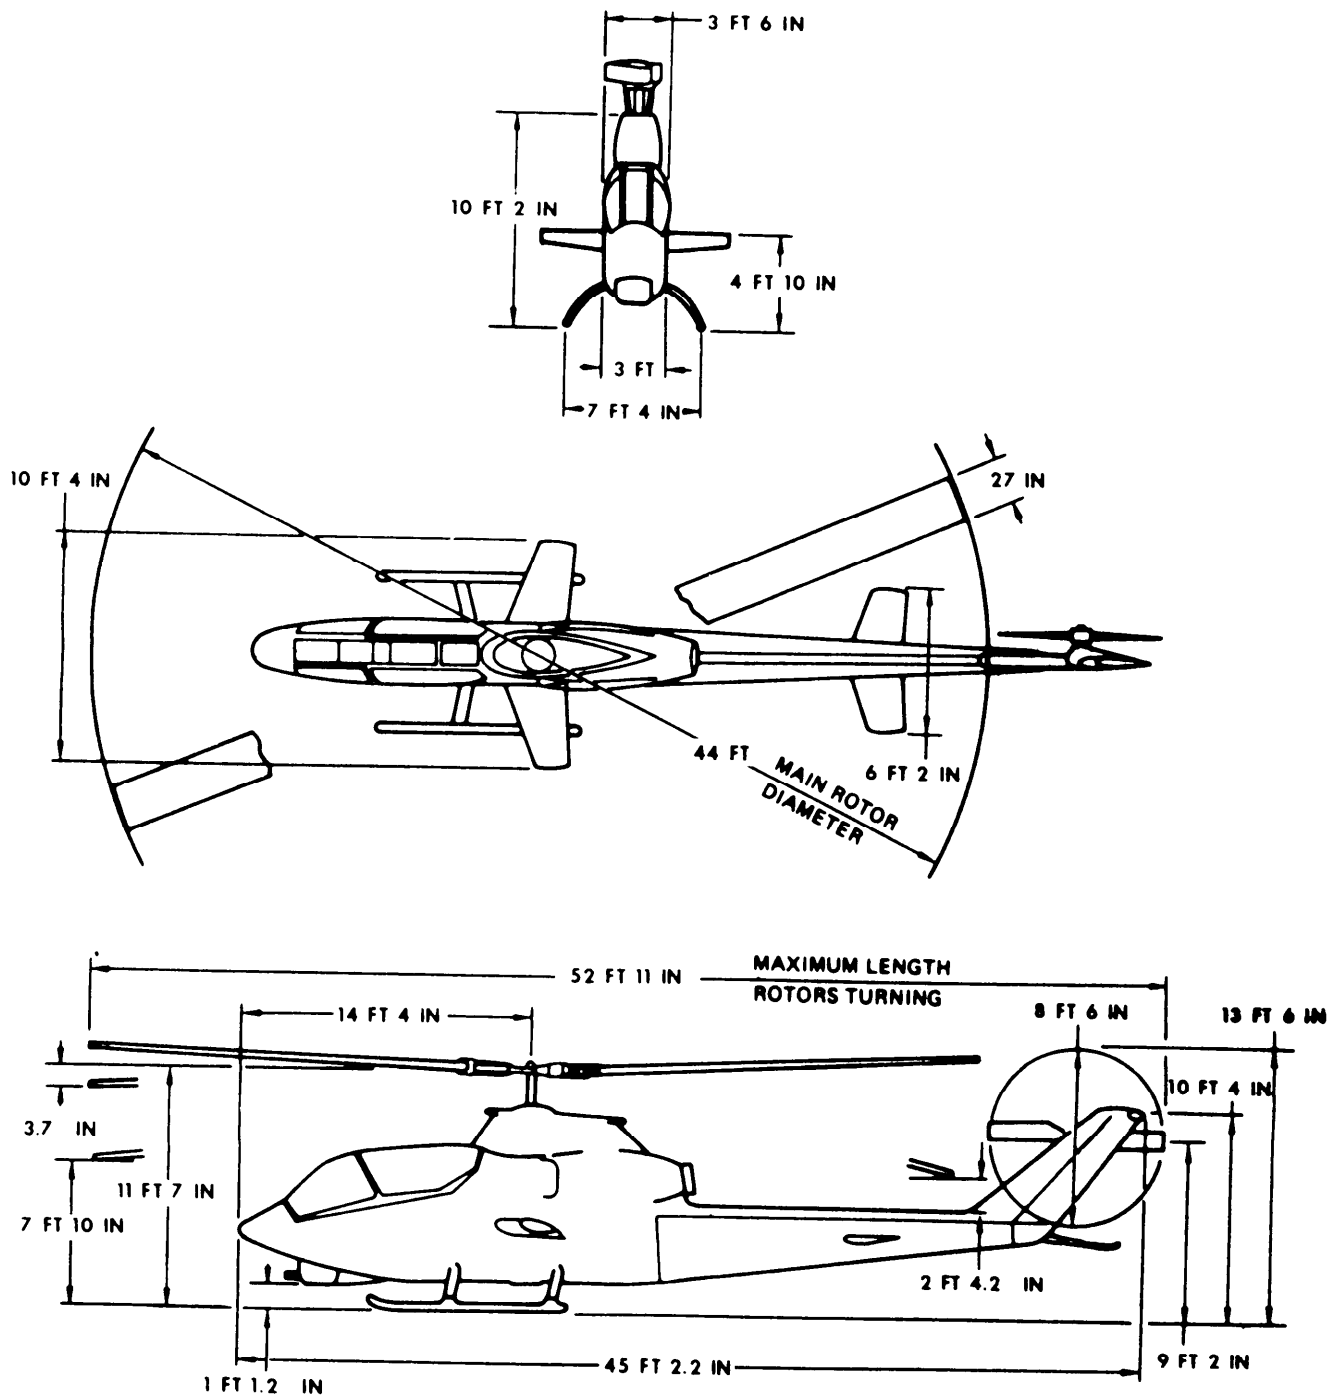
Principal dimensions, AH-1G (front, top, and side views).
